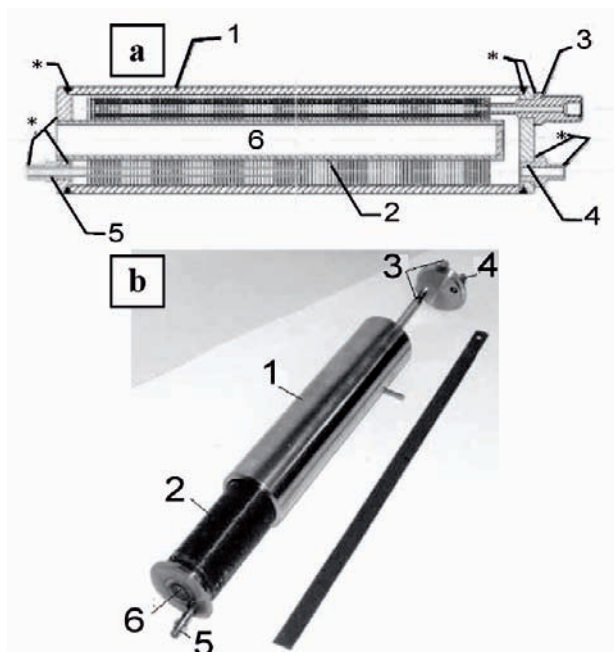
Assembly drawing (a) and general view before assembly (b) of M-H container: 1 - case, 2 - heat exchanger, 3 - filter with gas input/output fitting, 4 - point for metal-hydride loading, 5 - thermocouple shield, 6 - position for electric heater, * - welded seams.
